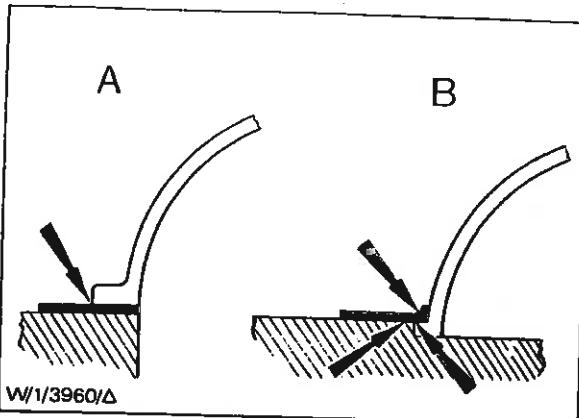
Oil Pan Gaskets and Seals Installation for All Engines Except 2728T
